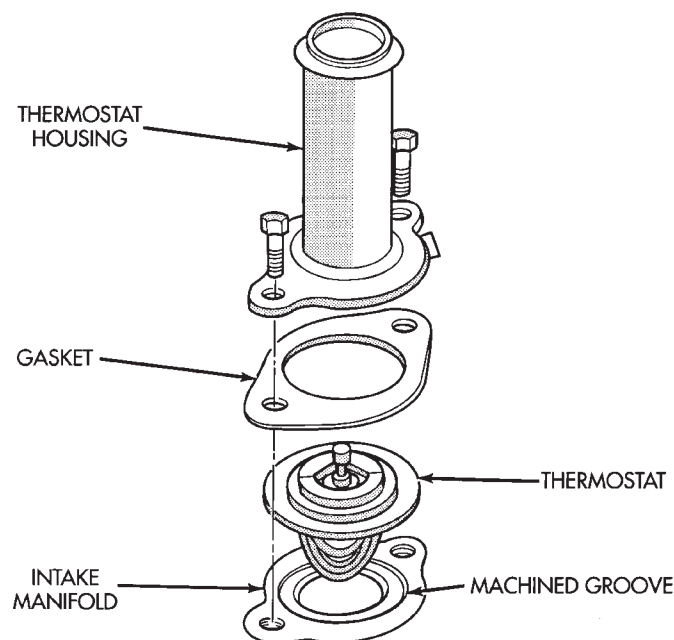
Thermostat—3.9L/5.2L/5.9L Engines
